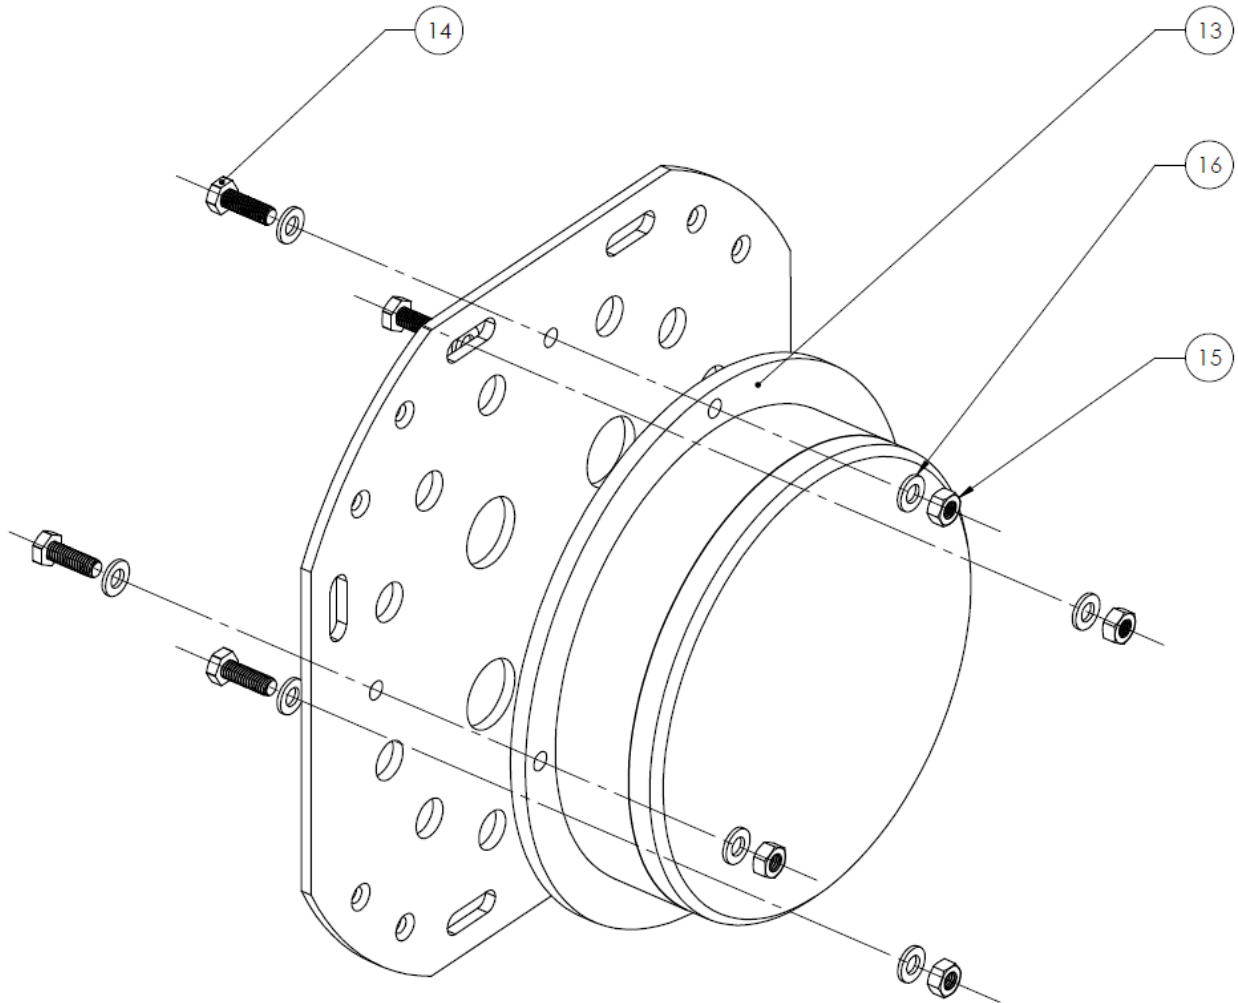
Exploded assembly drawing of the telemetry mounting interface
